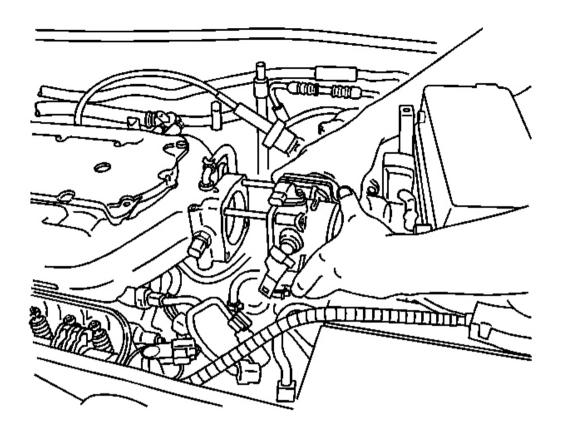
View Of Throttle Body Gasket Courtesy of GENERAL MOTORS CORP.
